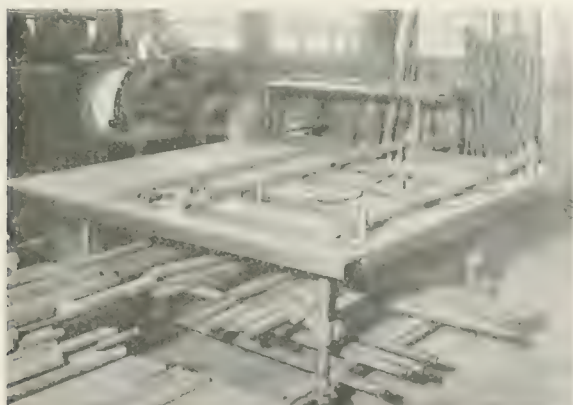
ASSEMBLY TABLE FOR THE PIPE FRAME MOUNTINGS OF CONTROL PANELS.
